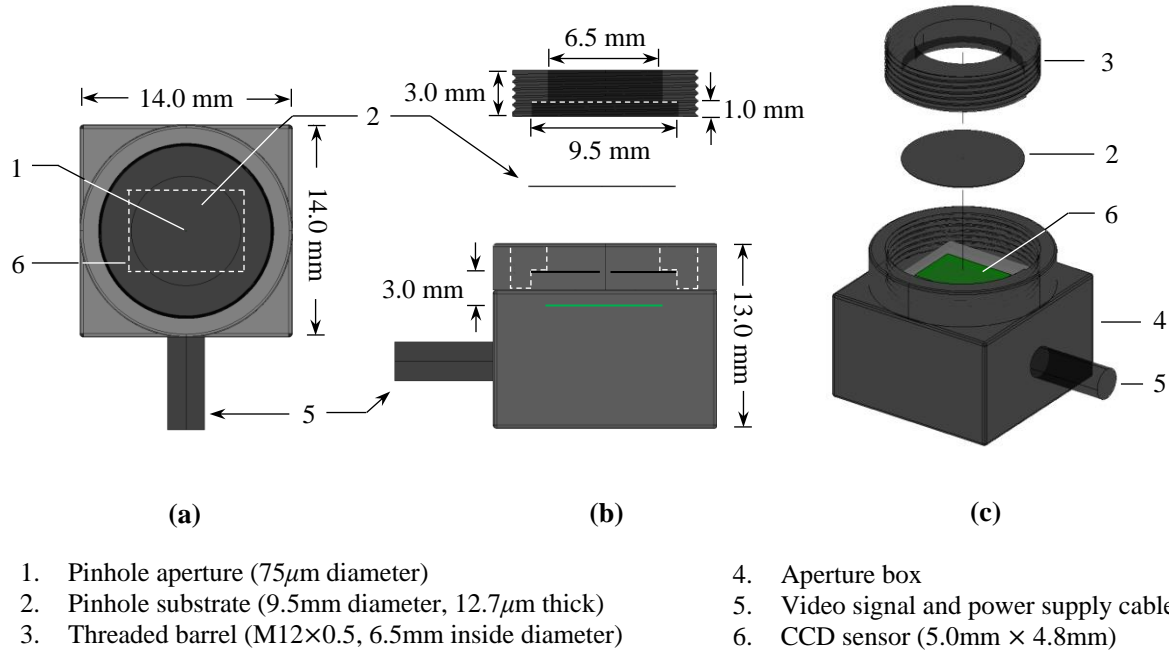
Schematic of (a) front view, (b) exploded side view, and (c) exploded orthogonal view of the BCPA.
